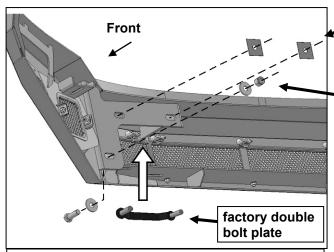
Remove rubber plugs to attach Top Light Bracket to Bumper
